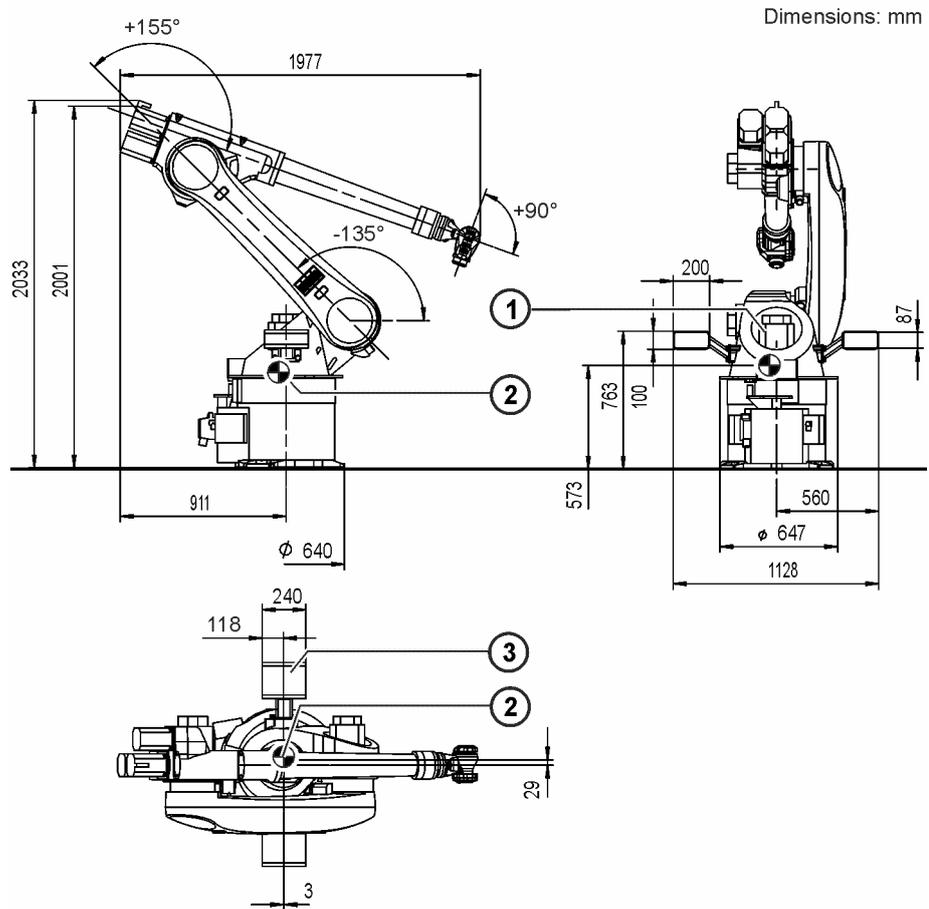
Transport dimensions, KR 30 L16-2 floor-mounted robot
